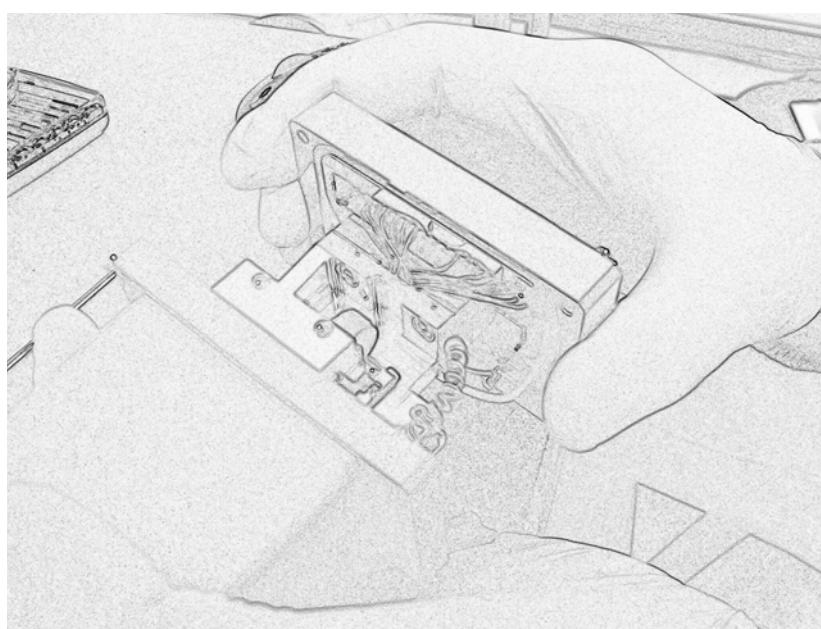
Dismantle the flange to gain access to the piezo motors
